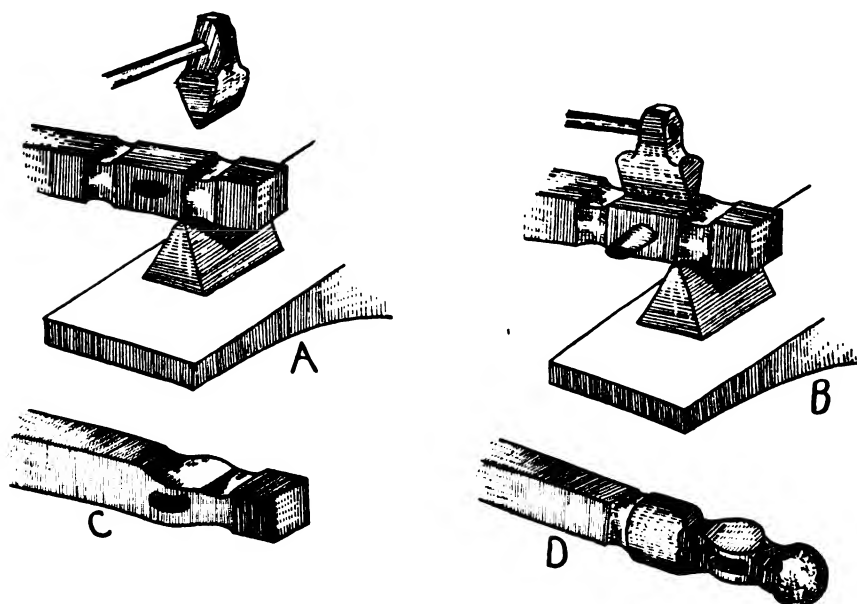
THE SUCCESSIVE STEPS IN THE FORGING OF A HAMMER
